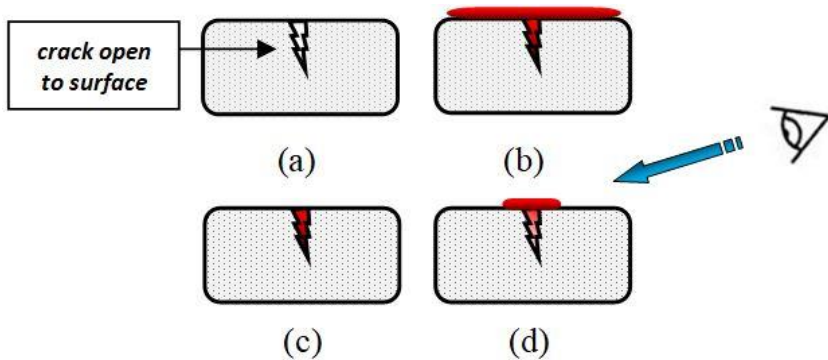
Schematic view of penetrant testing (a) defect open to surface (b) penetrant application throughout the surface (c) excess penetrant cleaned (d) developer application takes out the penetrant from the crack and provides easily inspection by eyes
